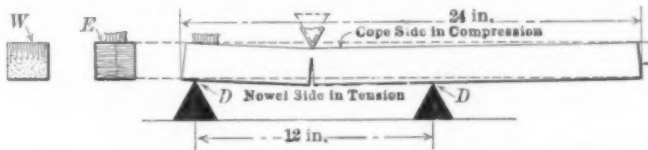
END AND SIDE VIEWS OF A TEST BAR MADE IN MOLD, FIG. 1
